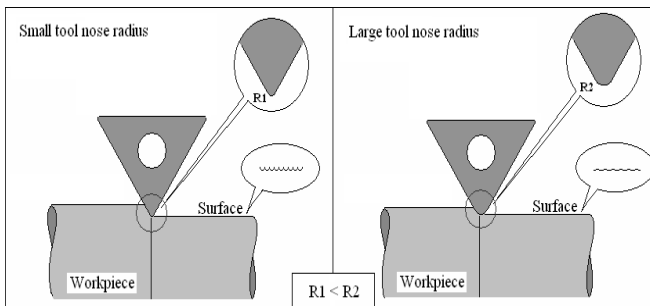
Illustration of tool nose radii of new tool R1, and worn tool R2
